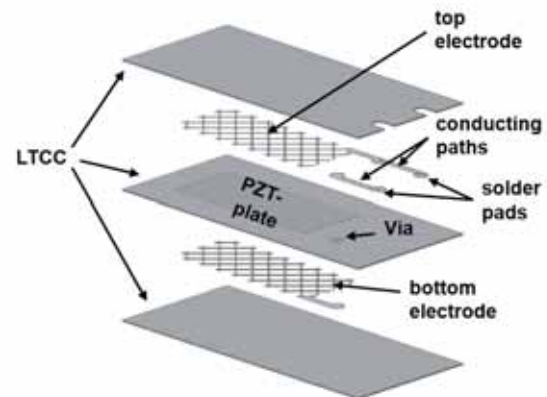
Schematic layout of LTCC/PZT module (enhanced explosion image) [14].
